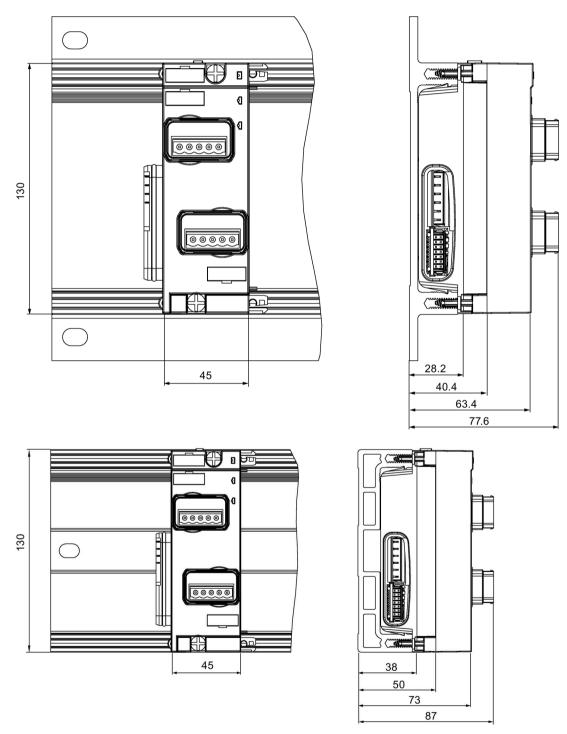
Dimension drawing of the outgoing module with CM PM-O PP connection module
